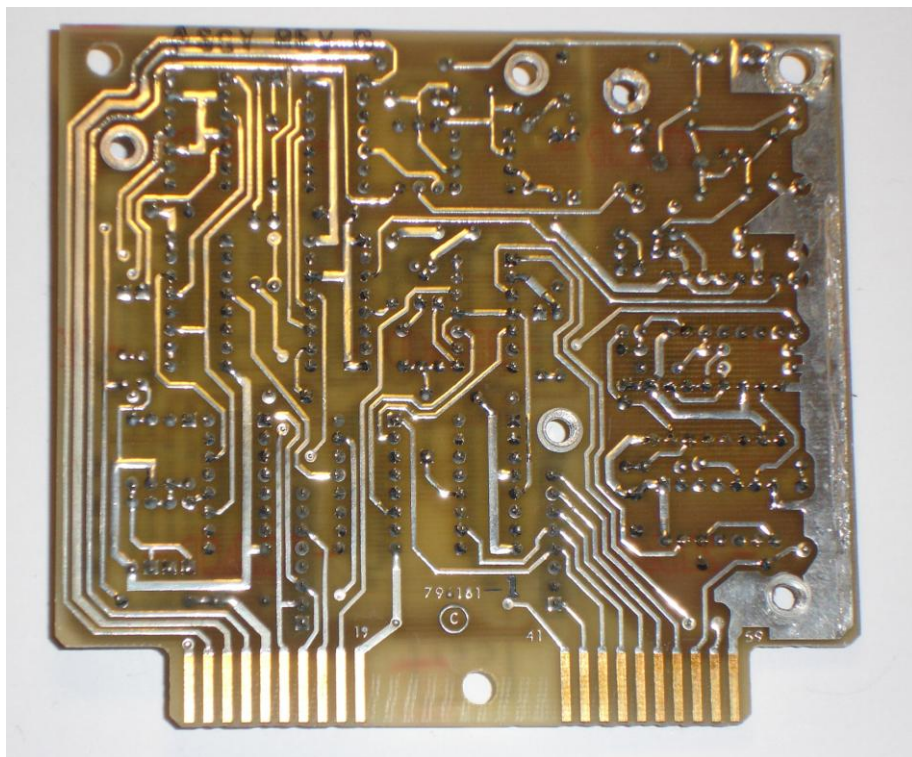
The rear side of the 796181-X 10-Hz BFO Option card PCB (shield removed).
